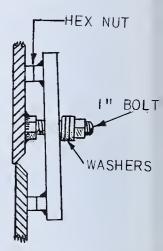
Adjusting Bolt. See Fig. 369 at h
